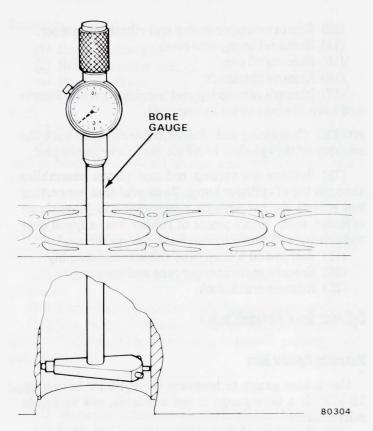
B-175 Measuring Cylinder Bore with Bore Gauge
